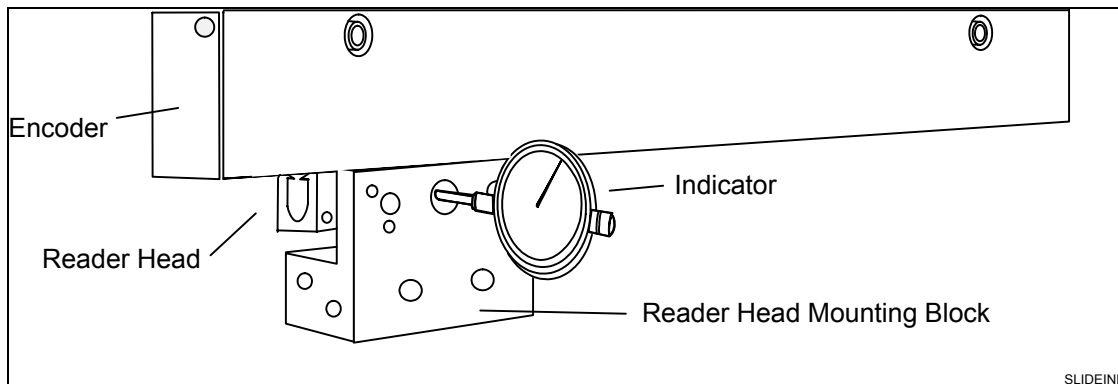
, Indicator Setup for Cross Slide Reader Head Alignment
